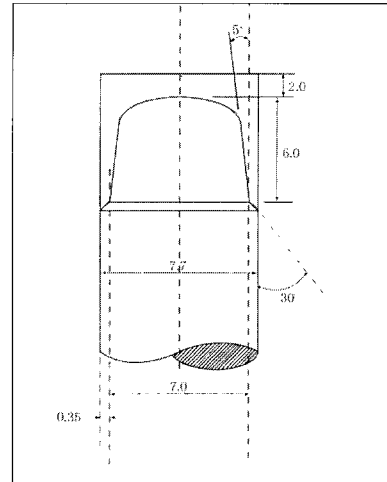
Dimensions of steel master die and cast crown (in mm).
